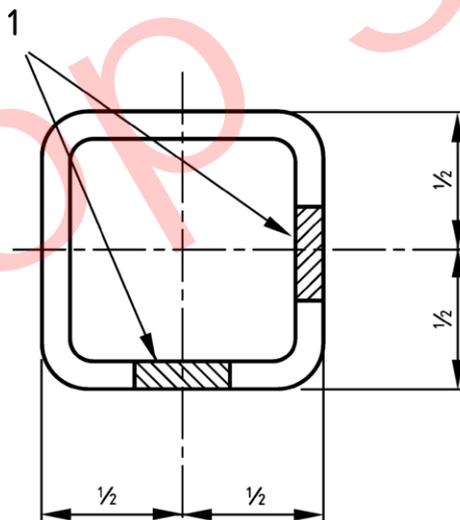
and A.2 give information on the location of samples and test pieces for hollow sections (see 5.2.2).
